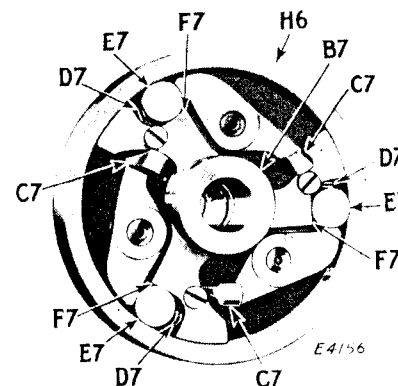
Rapid Feed Clutch Disc Showing Clutch Rollers, Springs, Levers and Carrier Assembled
